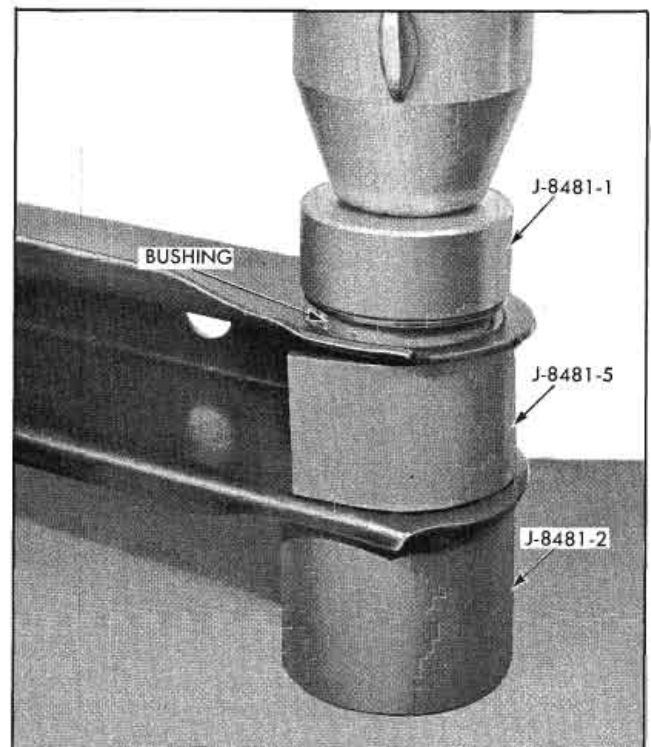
Installing Rear Upper and Lower Control Arm Bushing
